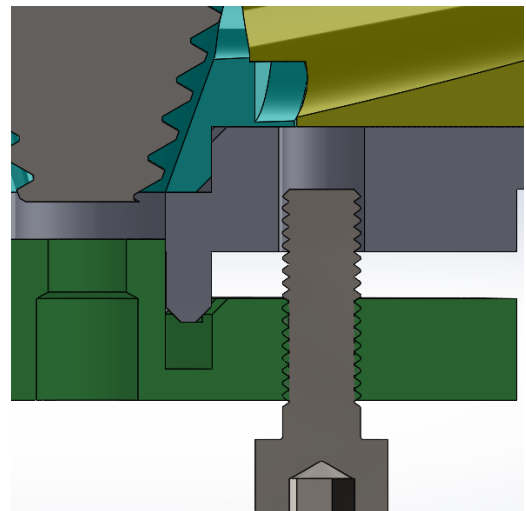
Modified FSE-setup: close-up of hexagonal bolt placed in the nozzle plate acting as dowel pin in the guiding plate
